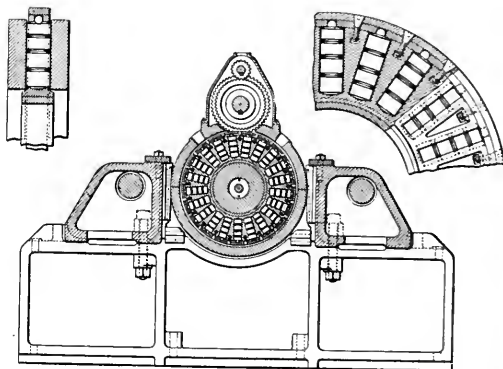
ANNULAR THRUST BEARINGS USED IN THE SLICK WHEEL MILL
